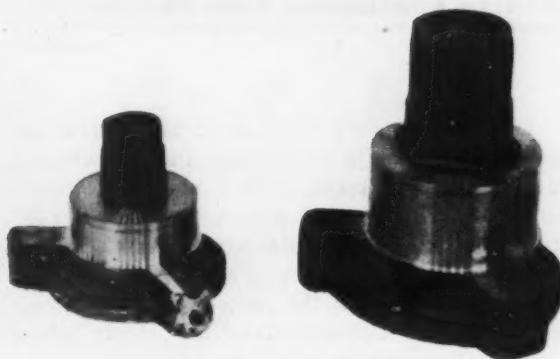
Typical die and cooling jacket assemblies. Note threads for mounting the graphite dies in the furnace crucible.
